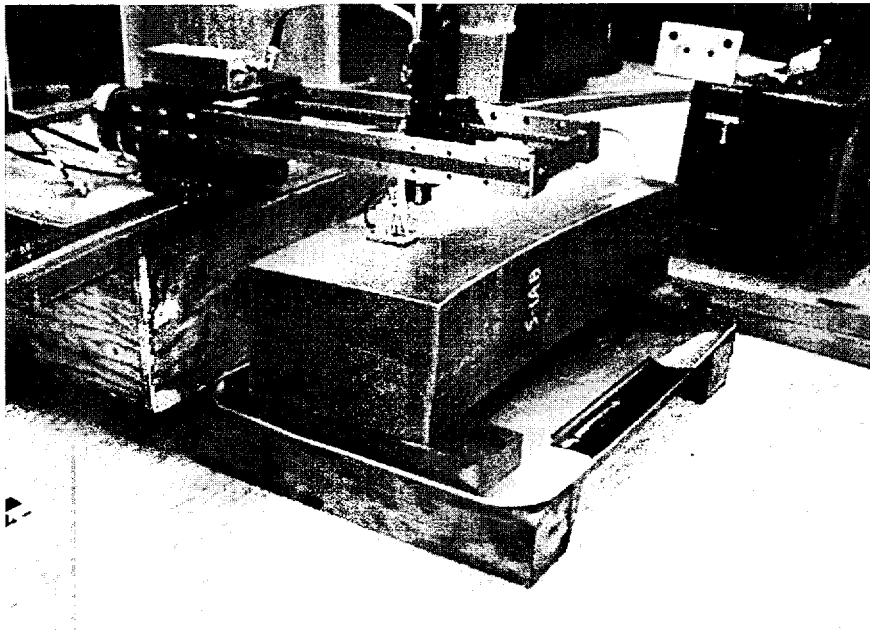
Weld Metal Specimen Prepared for Ultrasonic Inspection Normal to Weld
